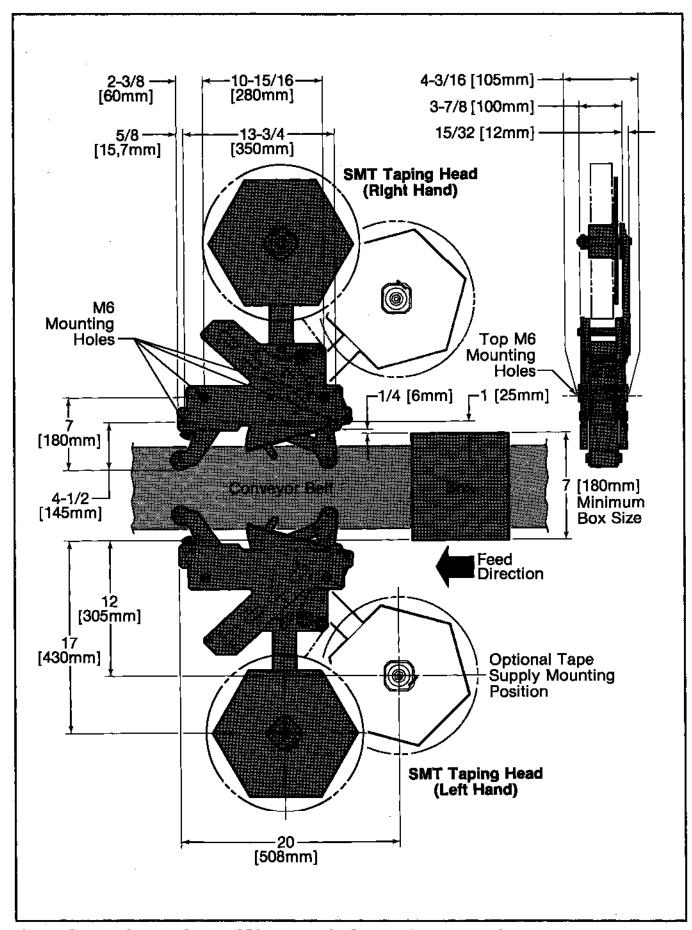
Taping Head Assemblies - Typical Mounting - Top Viev
